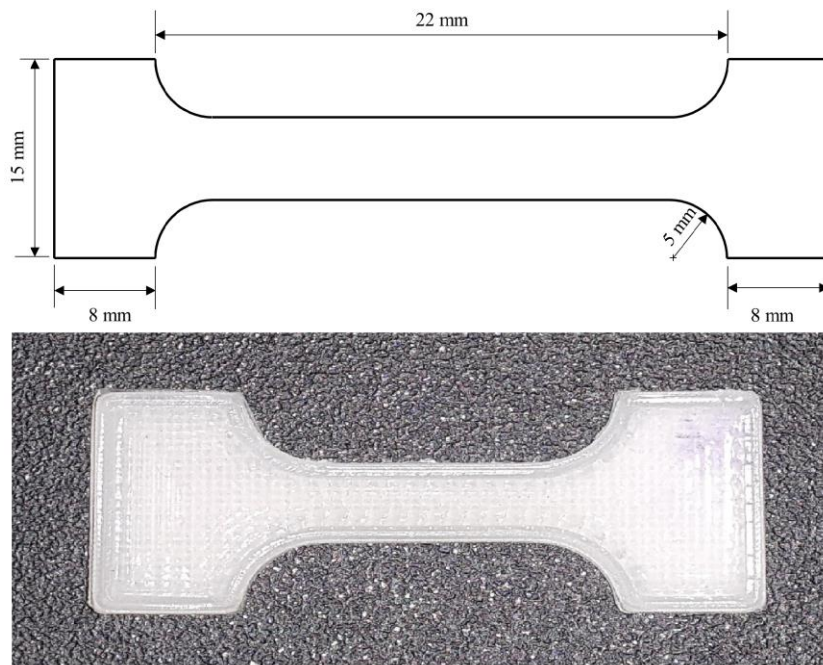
Tensile test specimen dimensions (top) and top surface of printed sample (bottom).
